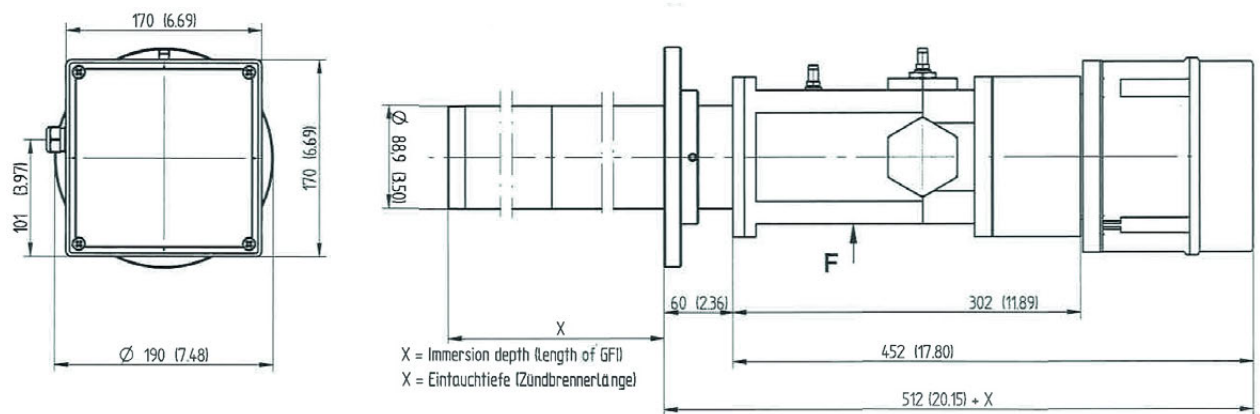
Dimensions of GFI89 pilot burner Ex-Zone 2
